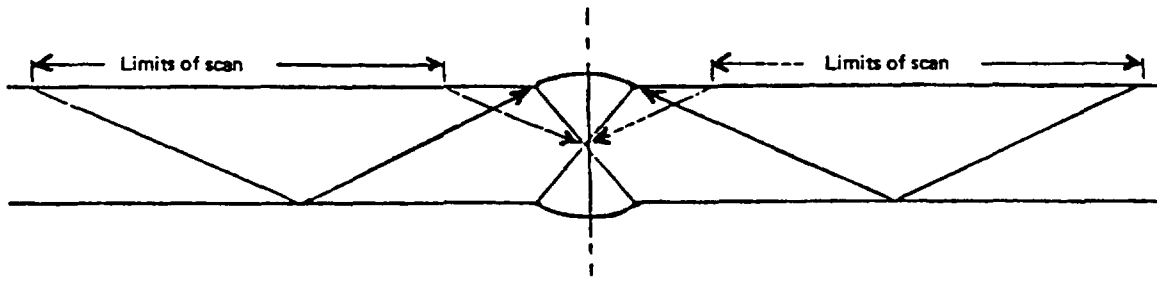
Marking scan area for double-vee welds.
